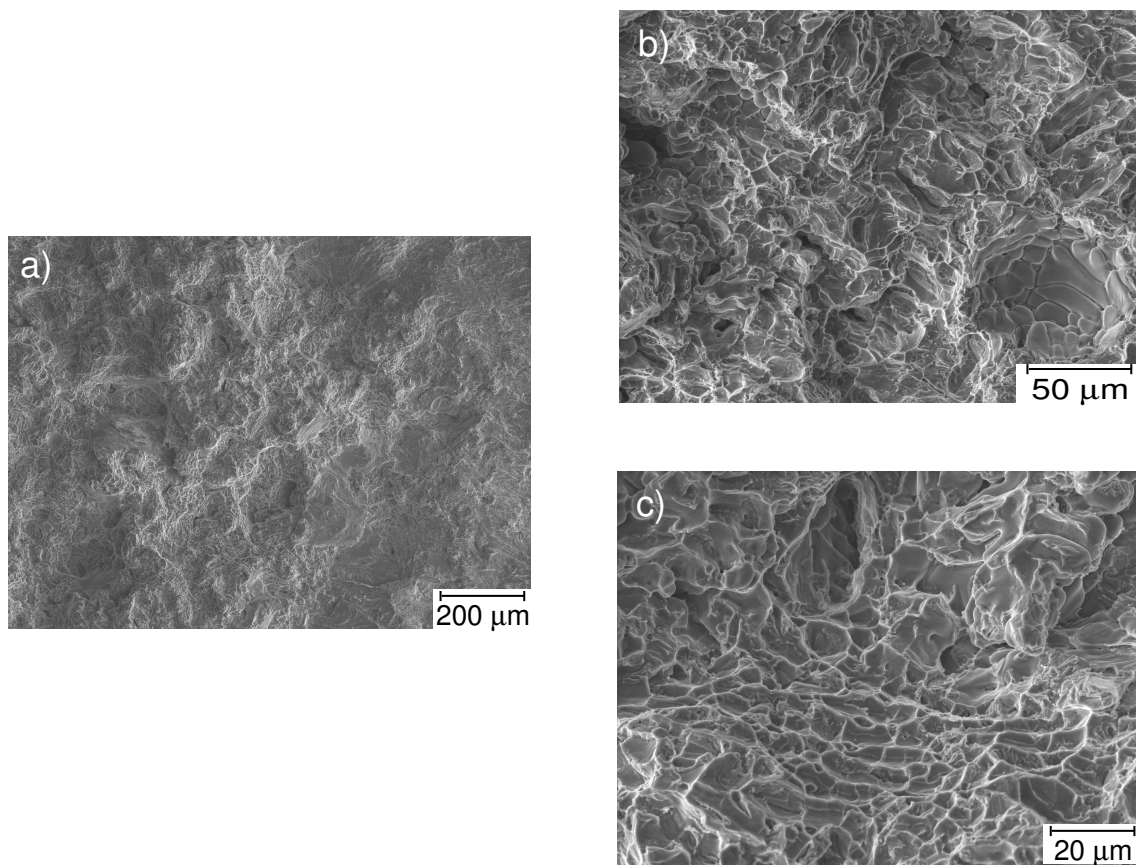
Fracture surfaces of Al6056 T78 fusion zone
